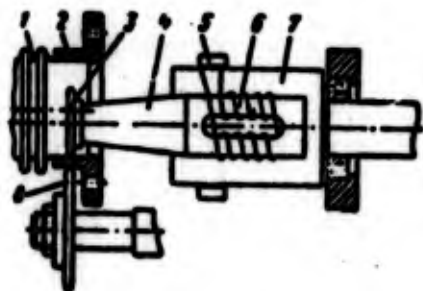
Diagram of the welding of the flange to the bellows: 1 - bellows; 2 - flange; 3 - upper roller; 4 - waveguide; 5 - brushes; 6 - magnetostrictive converter; 7 - cooling; 8 - supporting roller.
